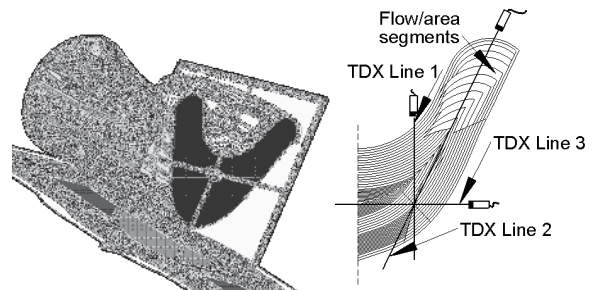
Isometric view of diaphragm valve design and transducer positions.
